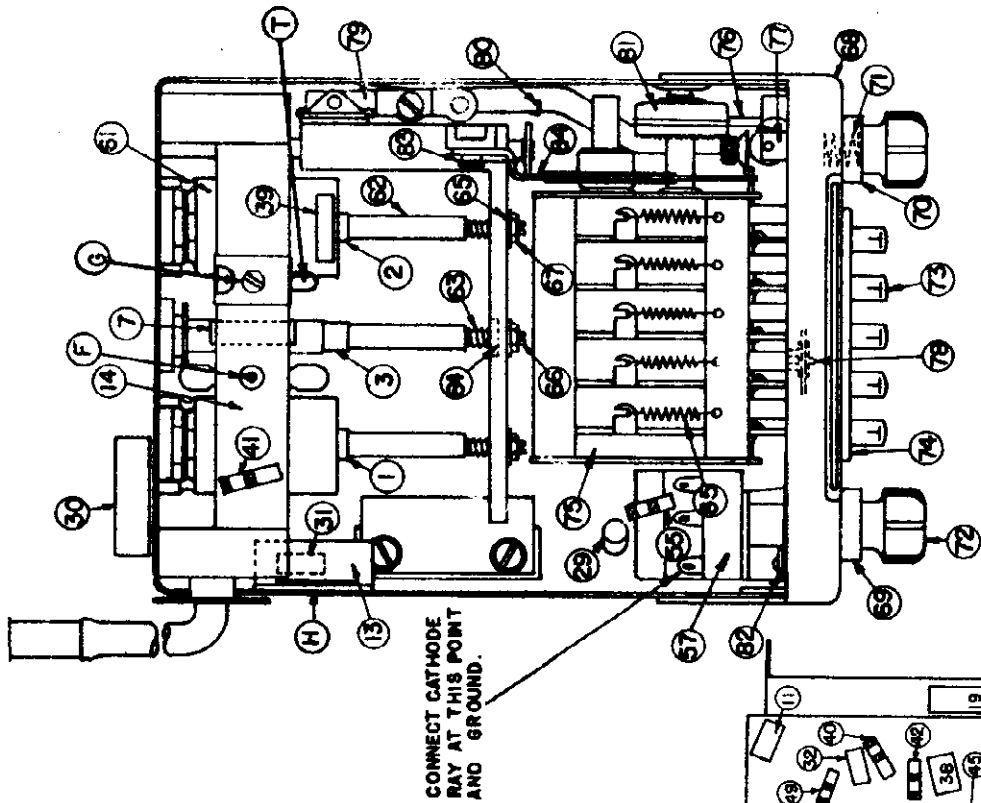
PARTS LAYOUT--TUNER ASSEMBLY
